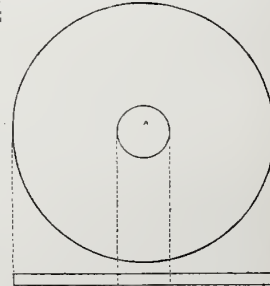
BOTTOM PIECE FOR INNER WHEEL
